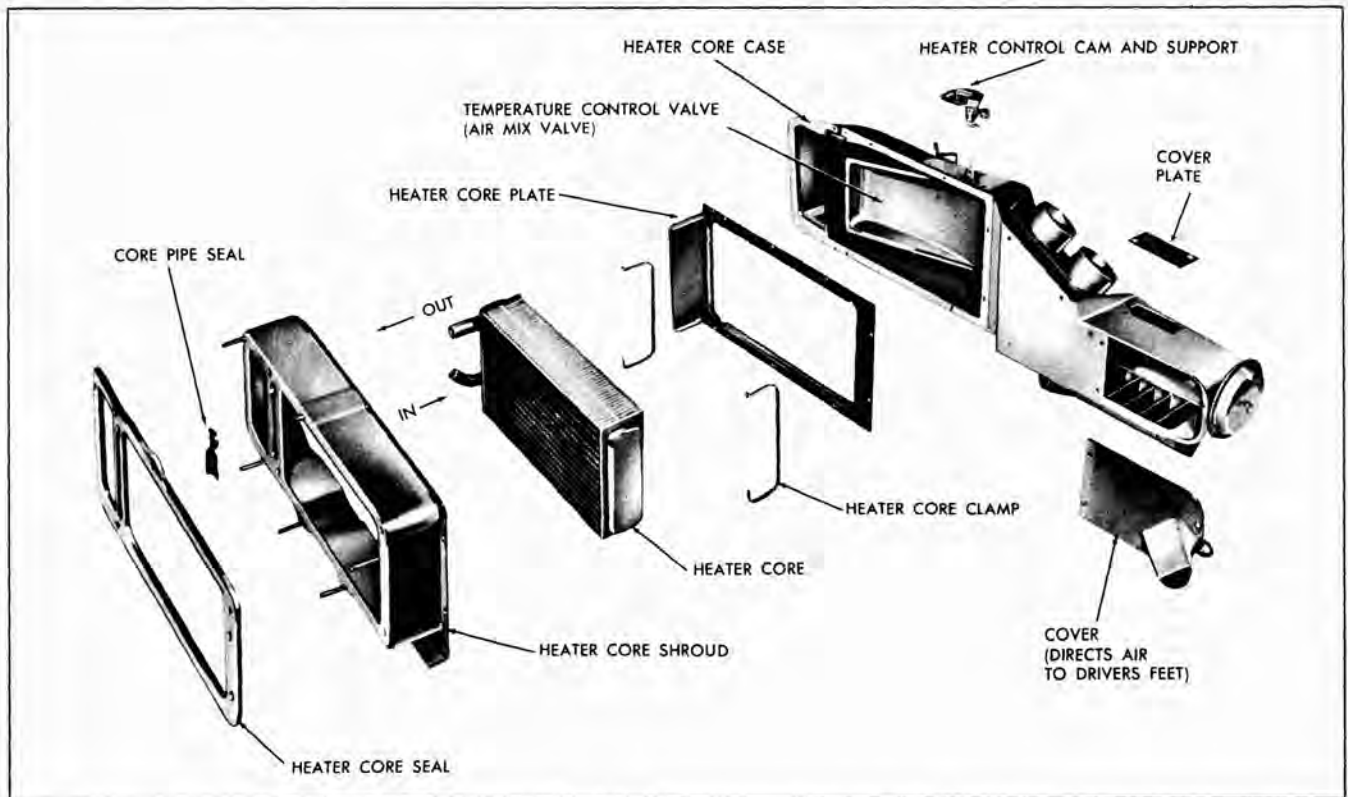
Circ-L-Aire Heater Core and Case Assembly (With Circ-L-Aire Conditioning)—Exploded View
